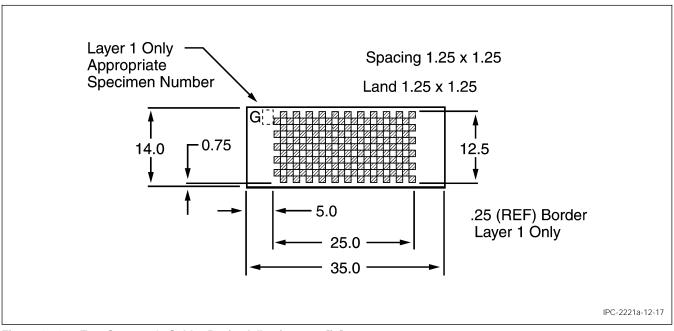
Test Coupon G, Solder Resist Adhesive, mm [in]
